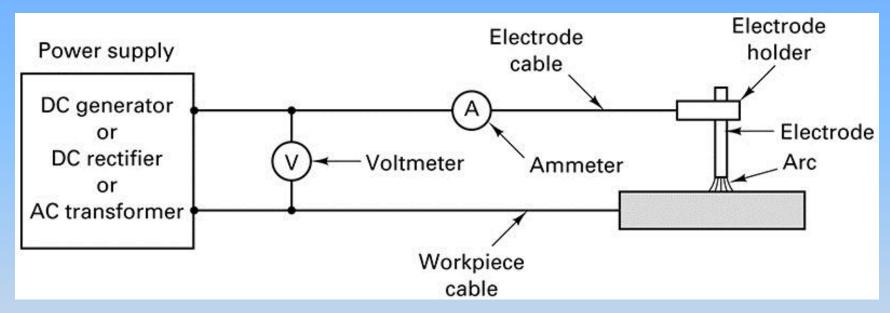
The basic electrical circuit for arc welding.
